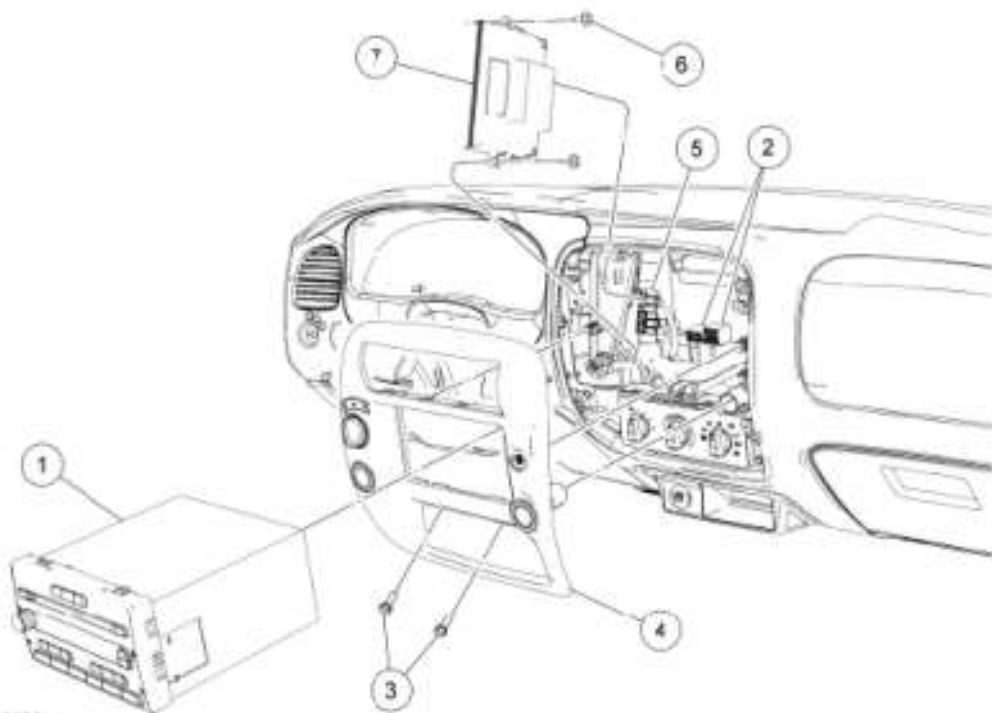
4X4 Control Module And Audio Unit Exploded View
